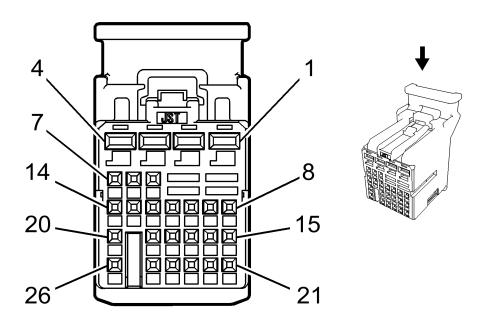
K9 Body Control Module X4 Connector End Views Courtesy of GENERAL MOTORS CORP.
